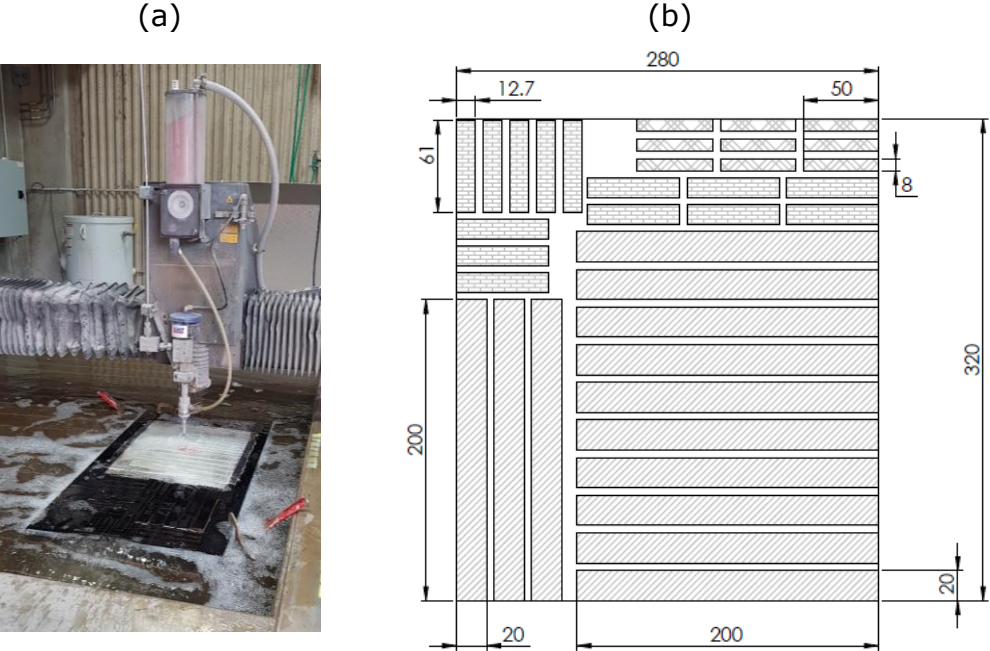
SMP and SMPC specimen cutting; (a) waterjet cutter and (b) cutting layout
